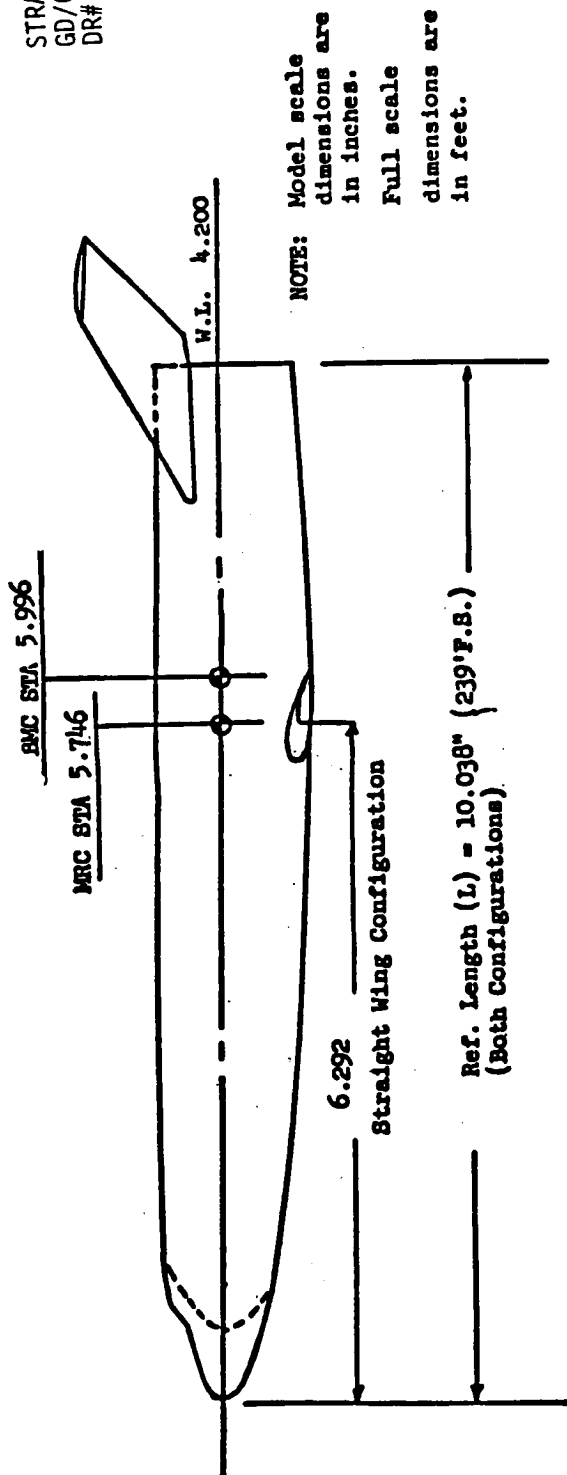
I-1 MODEL ASSEMBLY
